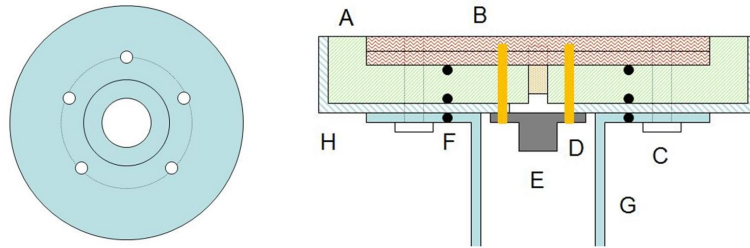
The left shows the hole layout, while the right is side cut of the electrode setup. A: Rexolite B: Stainless steel plates C: Ultem bolts D: (Yellow line) Water line E: Bulkhead connector for co-axial cable F: (Black circle) O-rings G: Stainless steel tubing H: Stainless steel bucket
